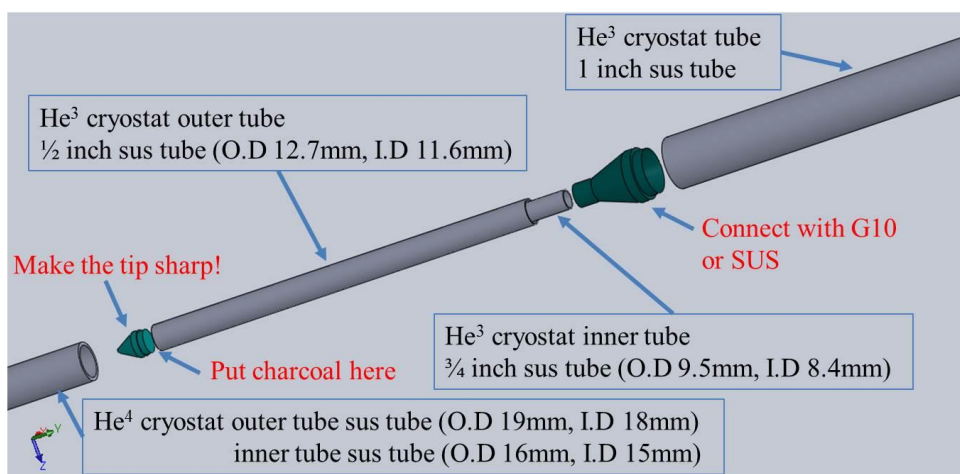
The tip part of the helium3 cryostat of Version1 which consists of G10 and SUS tube.
